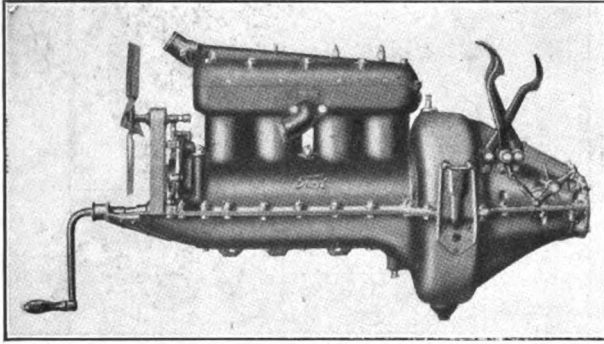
Showing Radiator and Connections Displaced, and Front Bearing of Motor.
